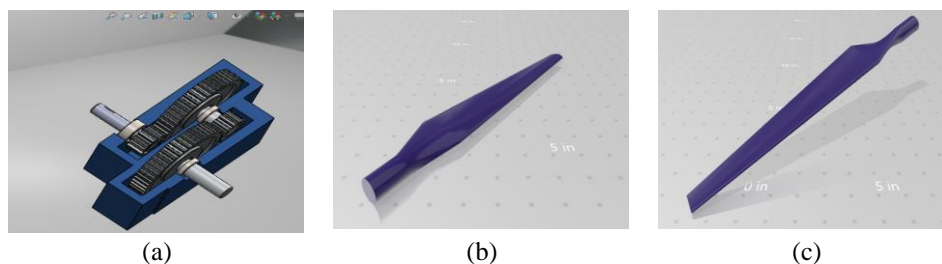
Designed gearbox (a) 3D view, (b) blade's front side, and (c) blade's back side
